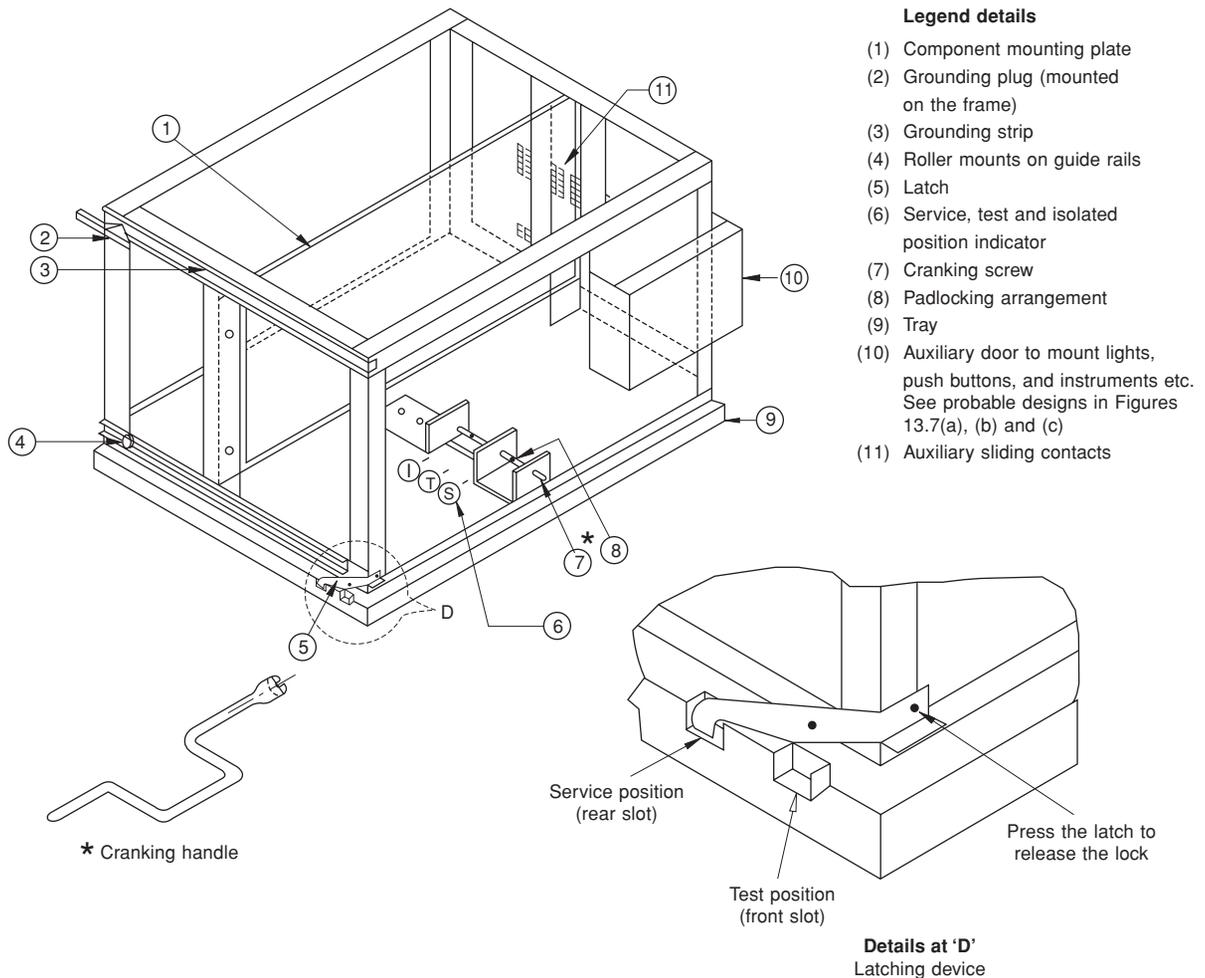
Front view of a typical withdrawable chassis (trolley)
